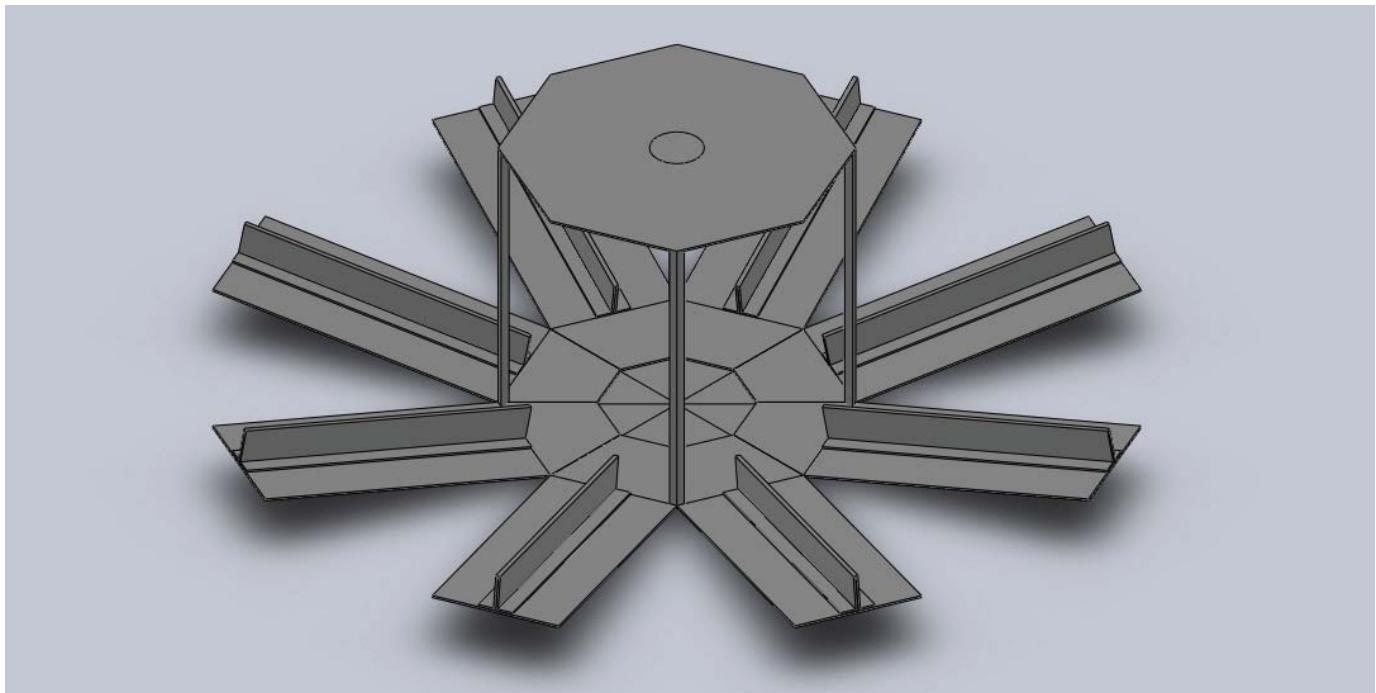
A SolidWorks rendering of one component of the Funky prototype. The 3D structure can be opened to allow the panels to lay flat for easy access to internal parts.
